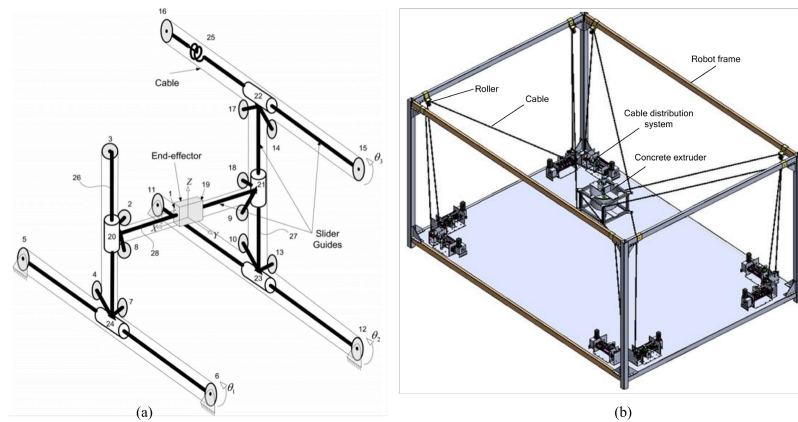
(a) Hybrid cable-driven cartesian mechanism [13] (b) Cable-driven parallel mechanism [14].
